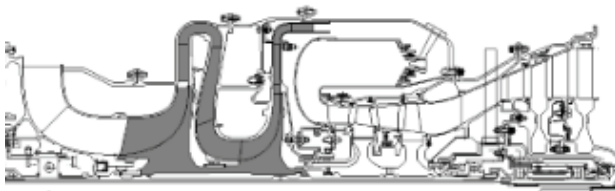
Schematic of turboshaft engine and core components⁽²⁾
